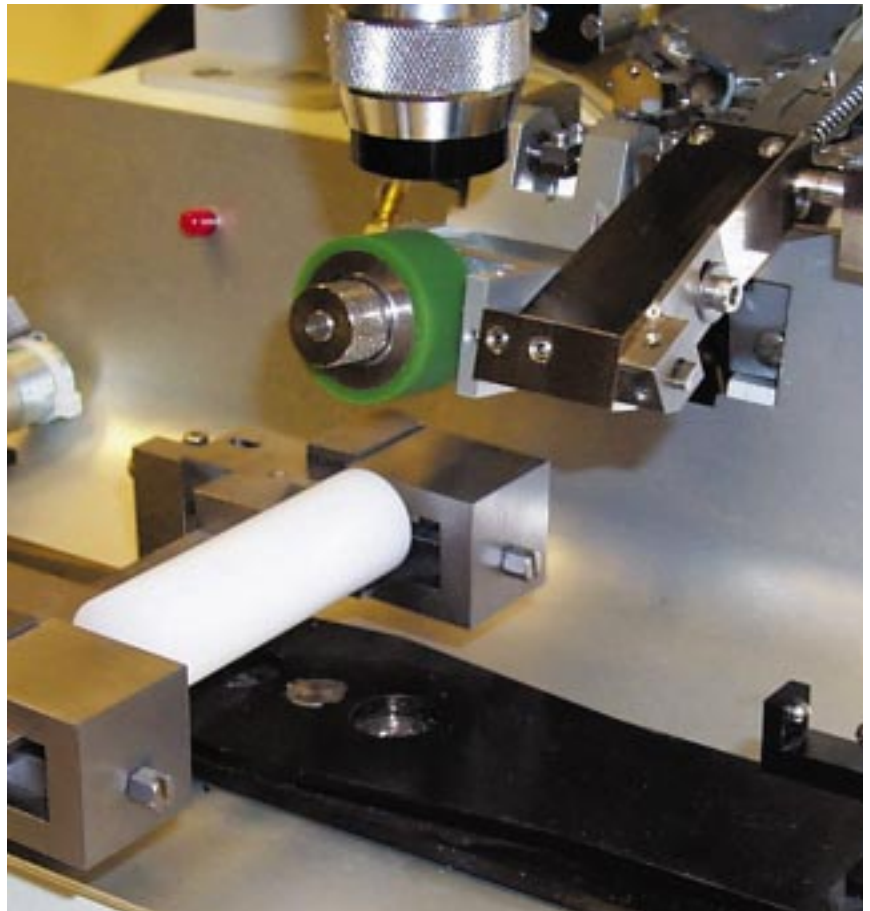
Closeup of roller mandrel and break wheel rotated 90°.
